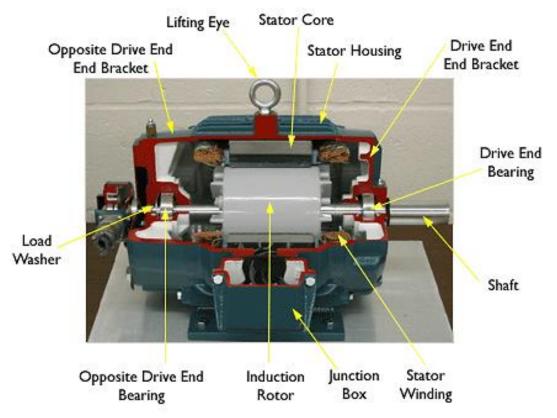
AC Motor Cutaway (Courtesy of Darby Electric Co., Inc.)
